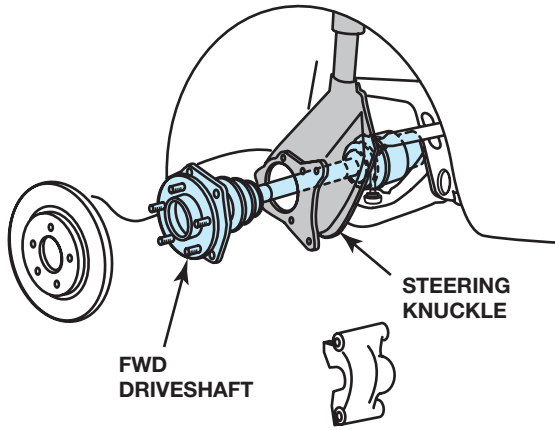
After the wheel bearing and inner CV joint have been disconnected from the steering knuckle, the hole in the steering knuckle on this FWD vehicle is large enough that the driveshaft with the hub and bearing can be removed through it.
